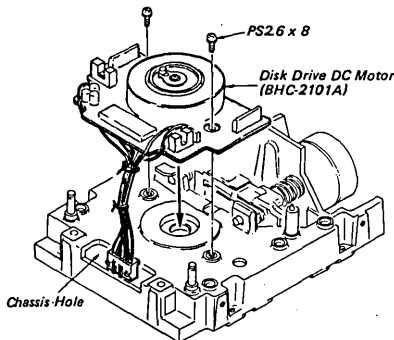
Disk Drive DC Motor (BHC-2101A) Replacement
